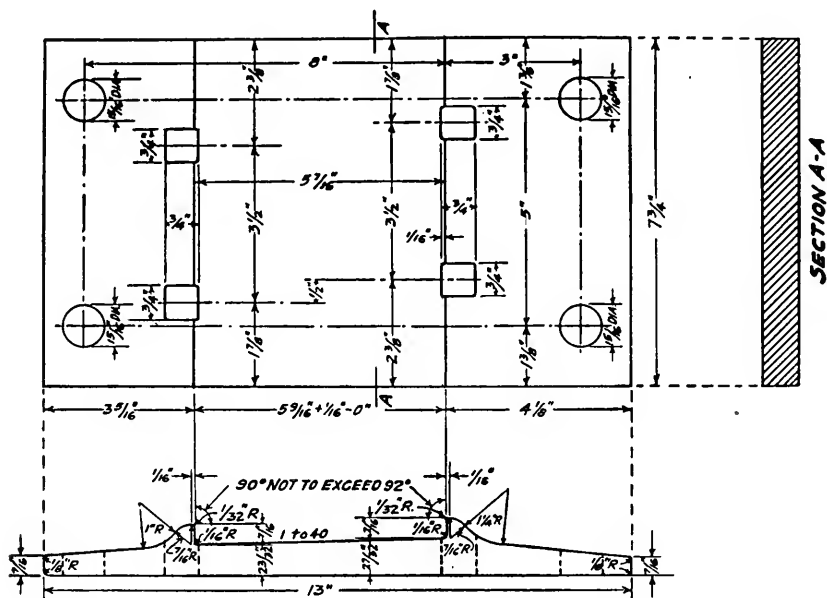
Plan T.P. 419 (AREA Plan C) Test Tie Plate for 112-lb. Rail.
